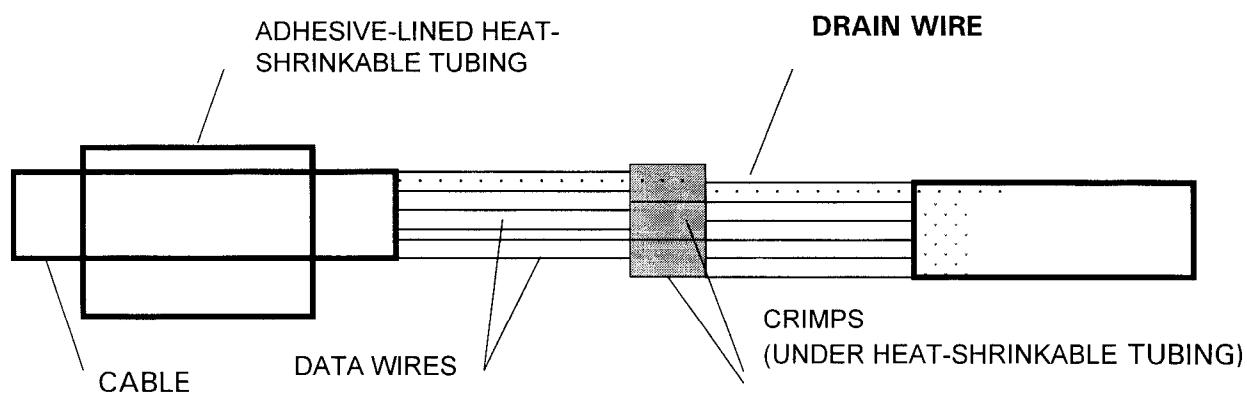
SEALED CABLE SPLICE-FINISHED ASSEMBLY
